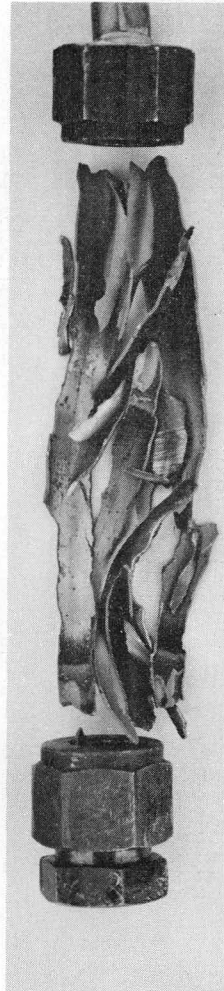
Typical Annealed Zircaloy-4 Burst-Test Specimens Showing Modes of Fracture
